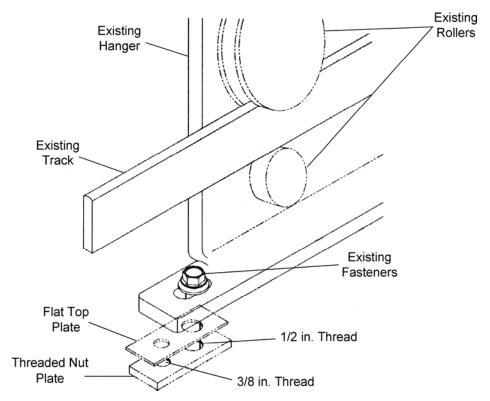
Loosely Thread the Fasteners into the Nut Plate
